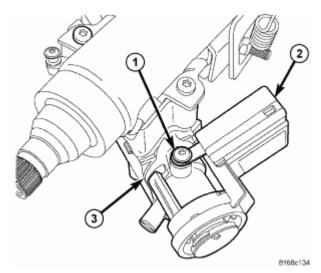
Identifying Screw, SKREEM/WCM & Lock Cylinder Housing Courtesy of CHRYSLER LLC
